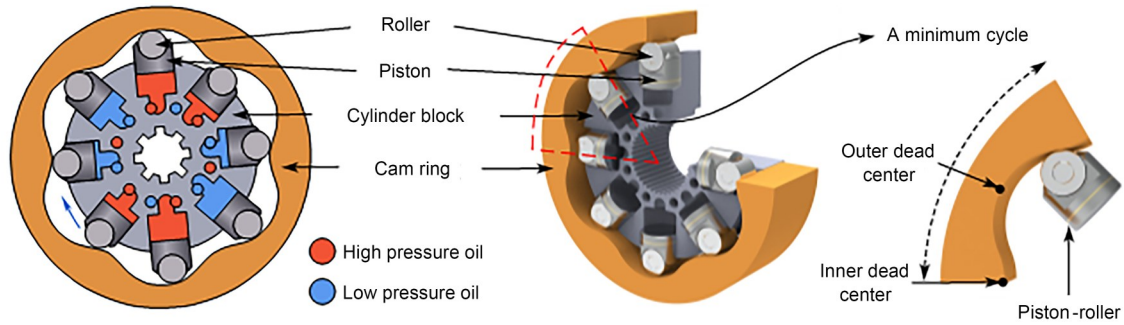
Typical configuration and working principle of a cam-lobe radial-piston hydraulic motor
